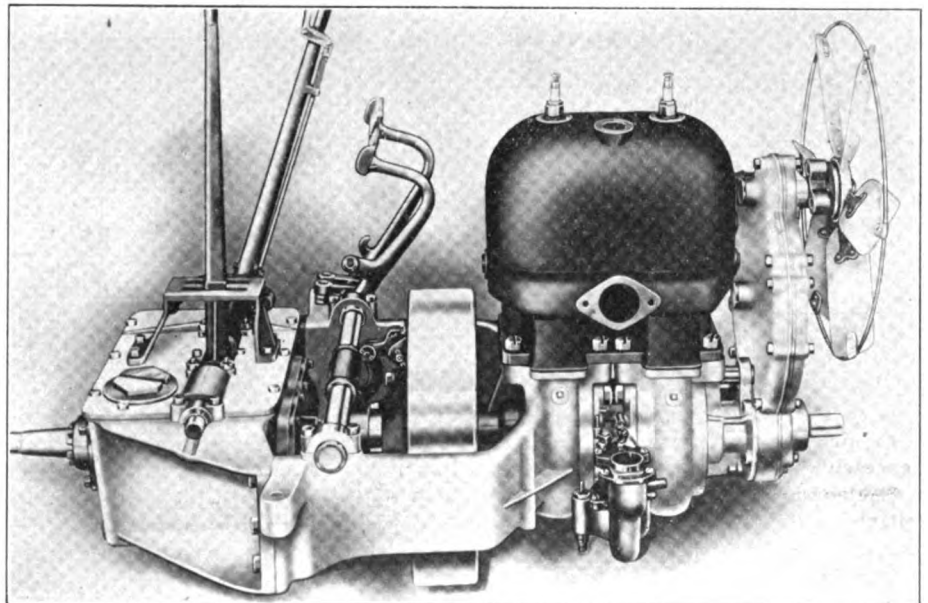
ATLAS UNIT SHOWING EXPOSED FLYWHEEL AND CLUTCH
